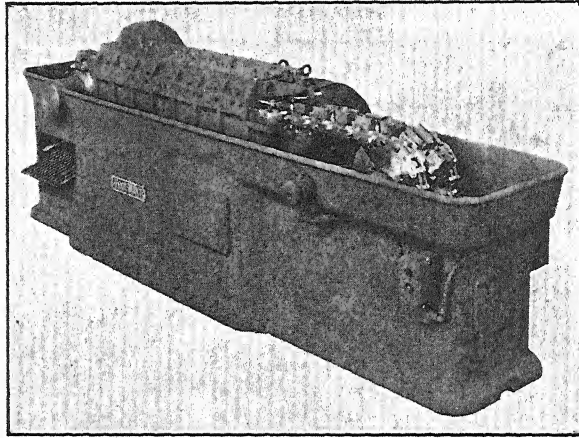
The Oilgear No. 4 Standard Horizontal Broaching Machine Arranged with Special Cutter Bar and Index Fixture for Broaching Square Holes in Jaw Clutches.
